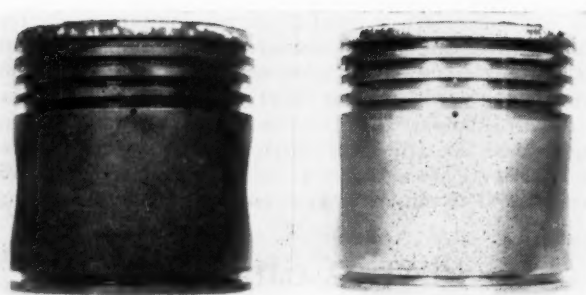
PISTONS TESTED IN A SINGLE-CYLINDER C.F.R. SUPERCHARGED ENGINE OPERATING FOR 50 HR
